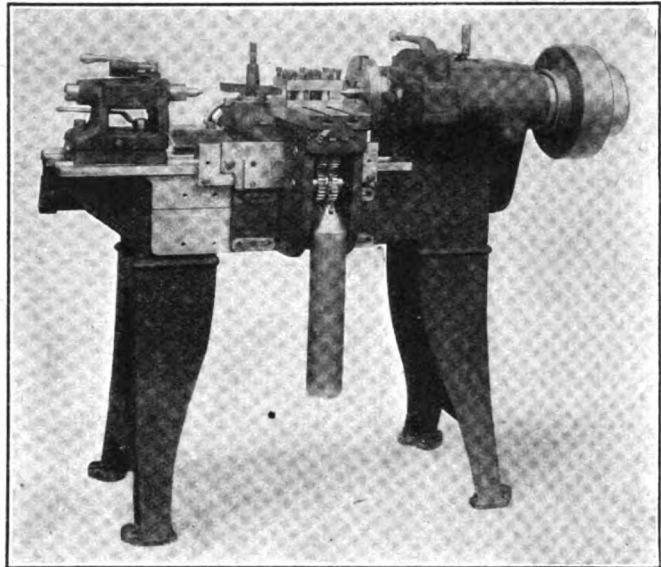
REAR VIEW OF LE BLOND LATHE SHOWING FACING ATTACHMENT
